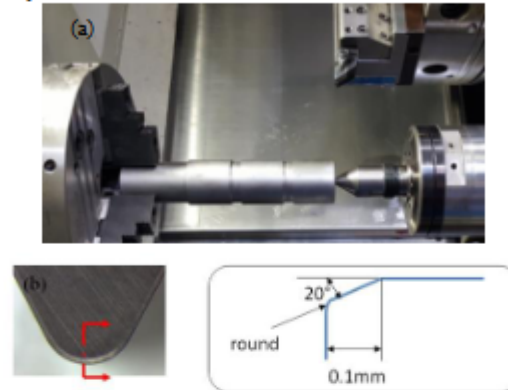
(a) Experimental set-up for hard machining; (b) CBN insert and its cutting edge
